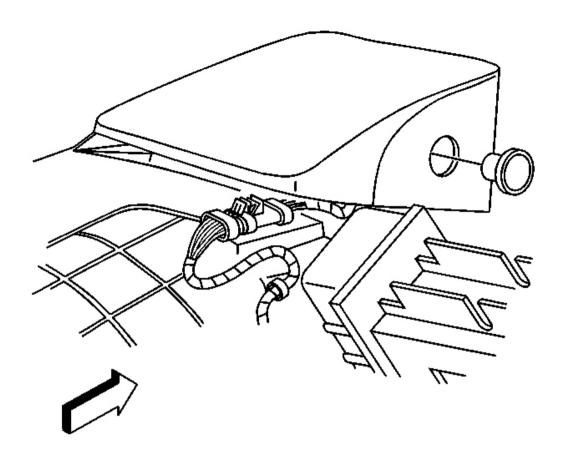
Headlamp To Headlamp Bezel Courtesy of GENERAL MOTORS CORP.
